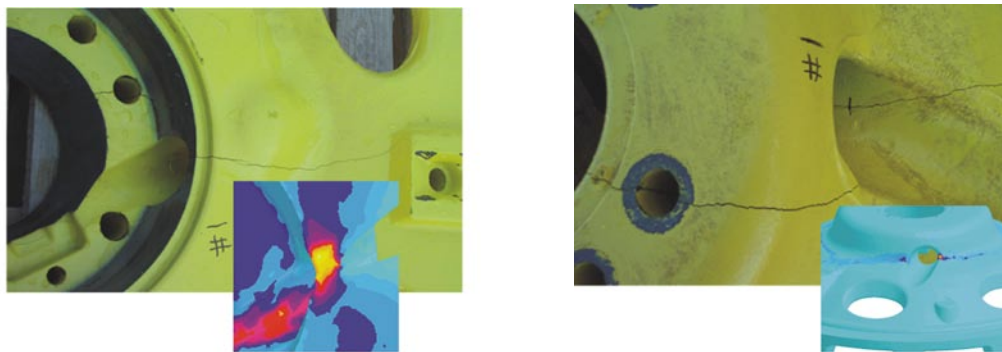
Crack formation in wheel weights. These grey iron castings didn't appear to have any defects after casting and did not show any obvious cracks or discontinuities during machining and painting. However, when the weights were mounted to the wheels, cracks appeared. Simulation of residual stresses showed that the material around the valve stem hole was damaged in the casting process. The residual stresses were not high enough to crack the casting during cooling, but the added load during mounting led to stresses exceeding the strength of the cast iron. The simulation depicts the starting point of crack (left). Additionally, high strains and strain rates during solidification, indicators for hot tearing, led to damaging conditions in the area where the crack migrated through the casting (right). The conclusion was that the design of the casting needed to be modified. With the new design, none of the castings failed during mounting.
